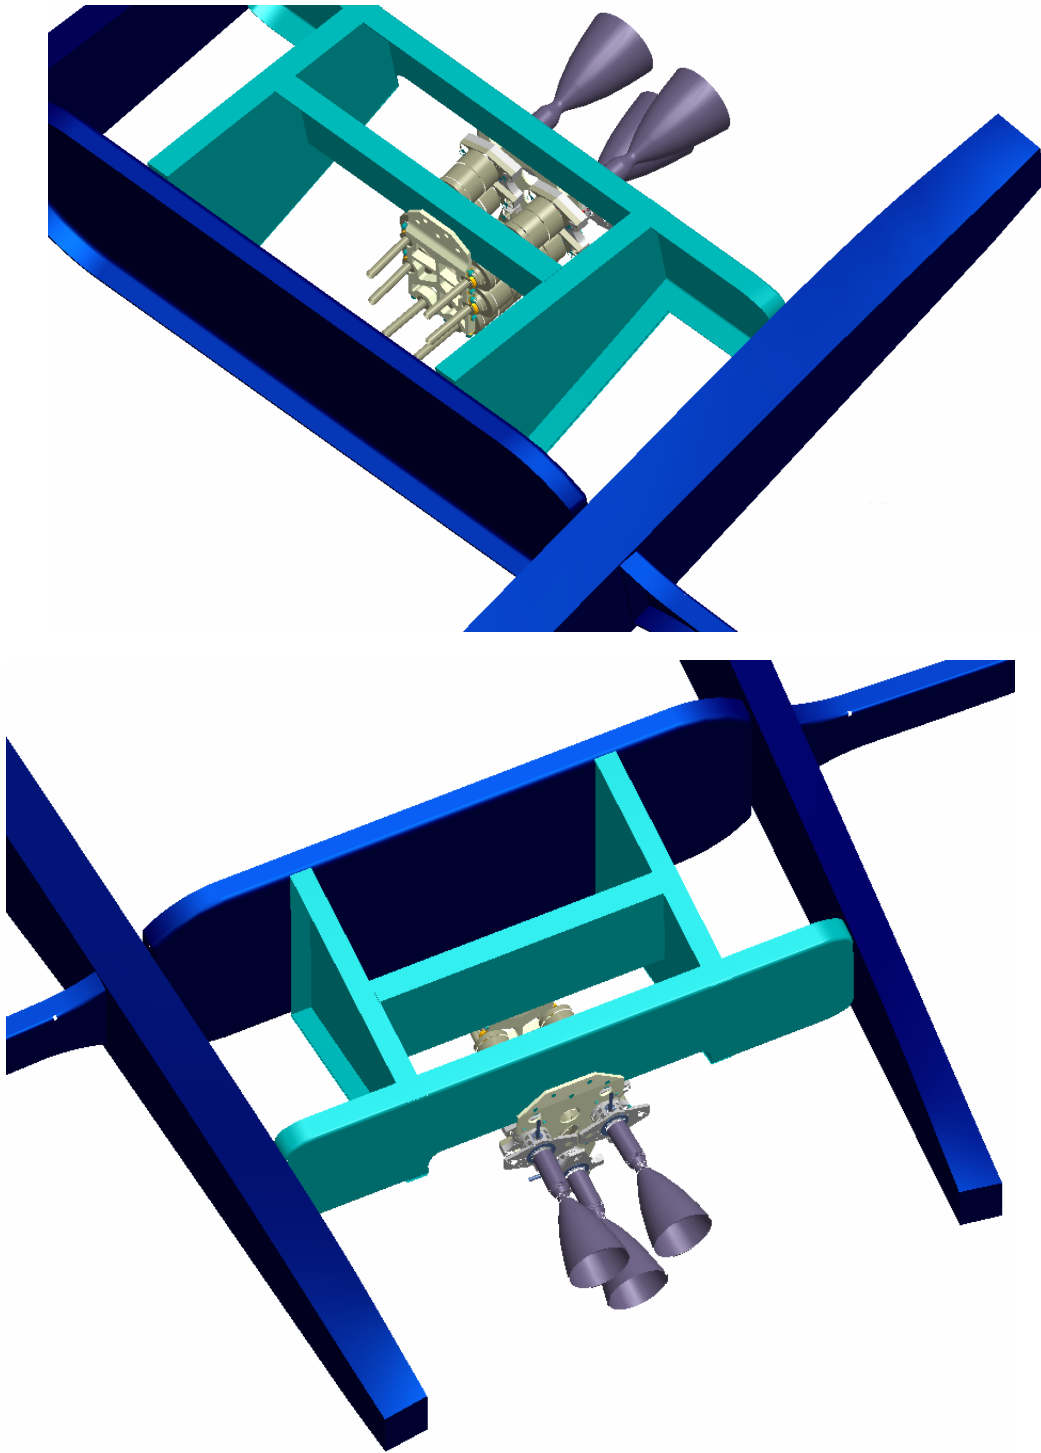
Triple 22N Triangular Thruster Assembly and Airframe Mounting Interface
